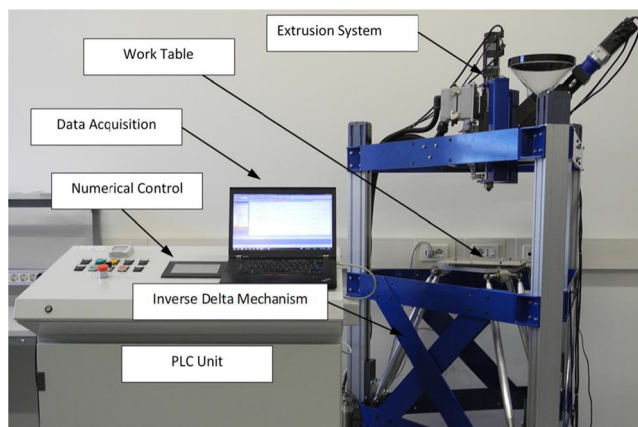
Extrusion-based additive manufacturing (EFESTO), showing key elements of machine
